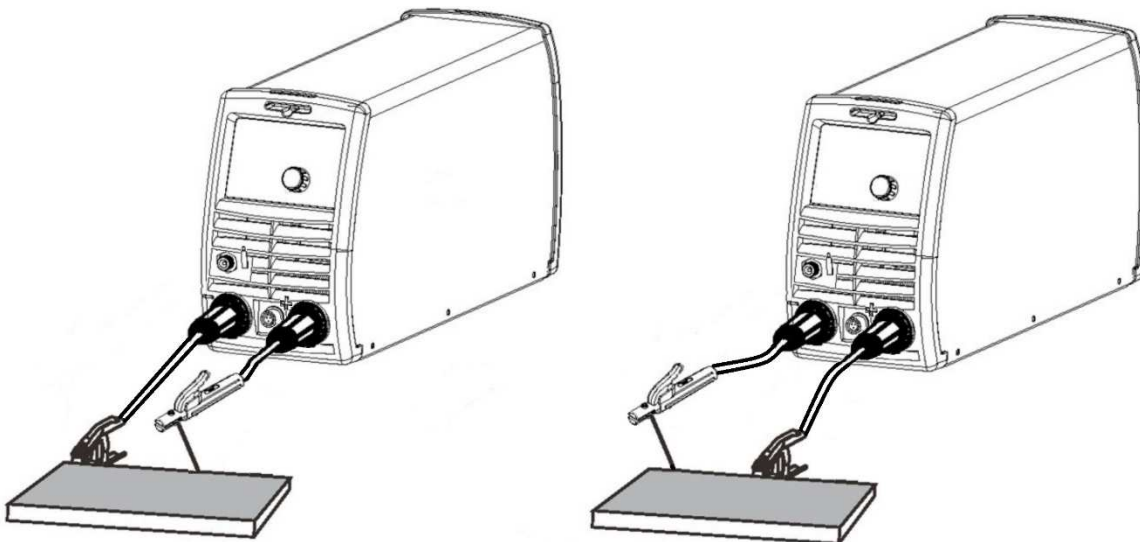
Ways of connecting the welding cables. Follow the instructions on the packing of the welding electrodes.
